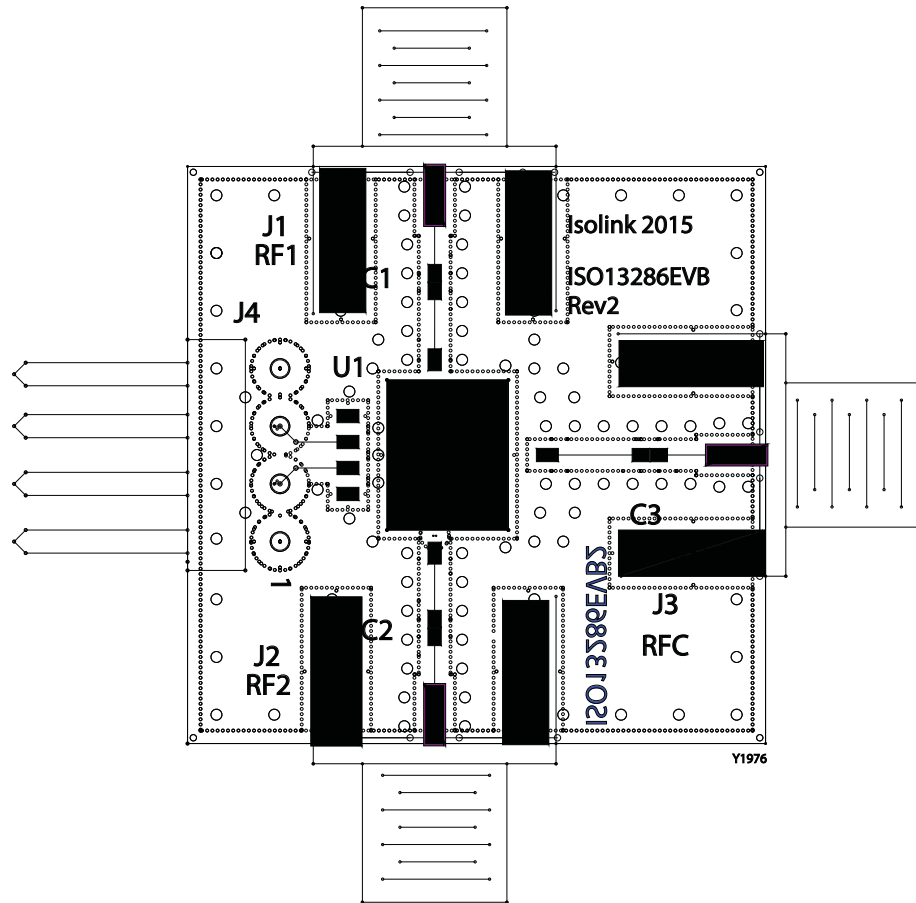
ISO13286 Evaluation Board Assembly Diagram
